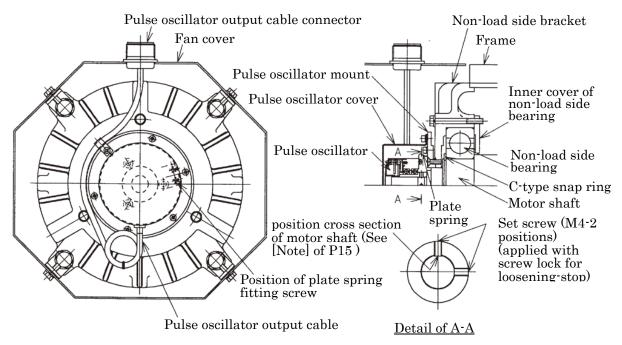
Detailed drawing of non-load side pulse oscillator and bearing part
